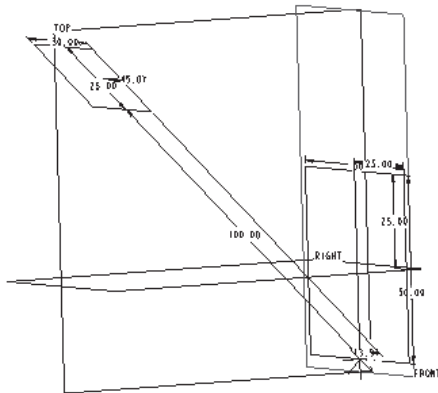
The two sections with dimensions and the default datum planes used to create the blend feature shown in the adjacent figure
